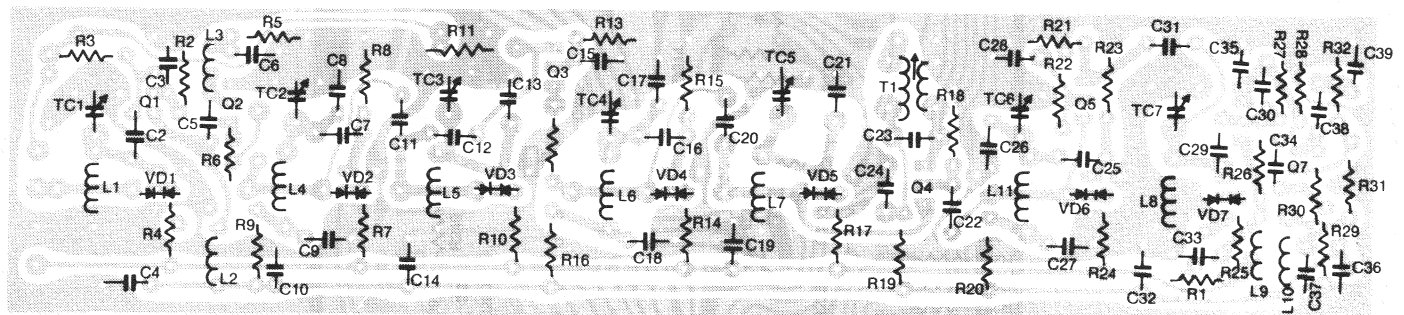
Front End Module Foil Board Layout; #Q42465J6
